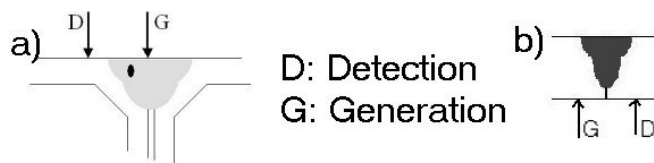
a) A cavity in the weld. b) Incomplete penetration of the weld.
